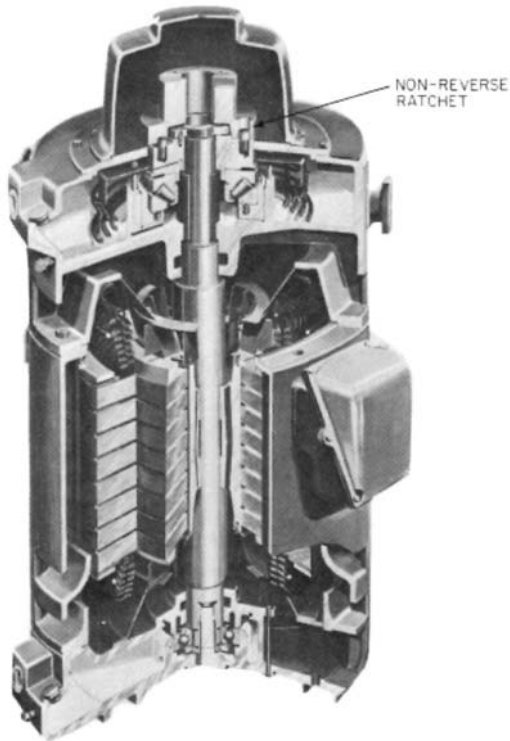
Section of vertical hollow shaft motor showing nonreverse ratchet. Spring-loaded pins ride on ratchet plate in one direction only (General Electric).
